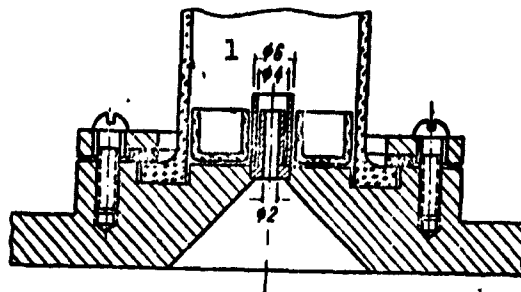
Method of sealing source housing at upper flange. 1) Diameter 6 [mm].
